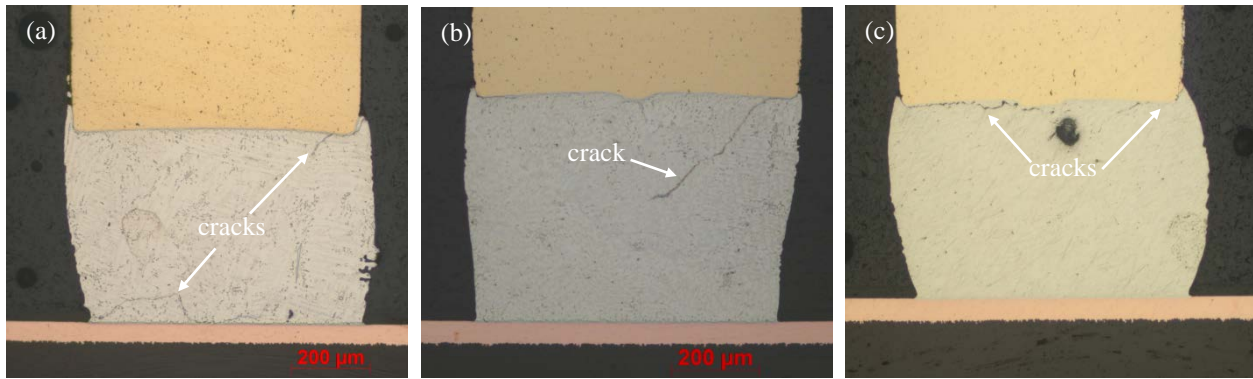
Cross-sections of specimen potted with PM6 cycled with profile 3 showing (a) 45° crack through bulk solder (b) crack at intermetallic interface (c) partially cracked joint
